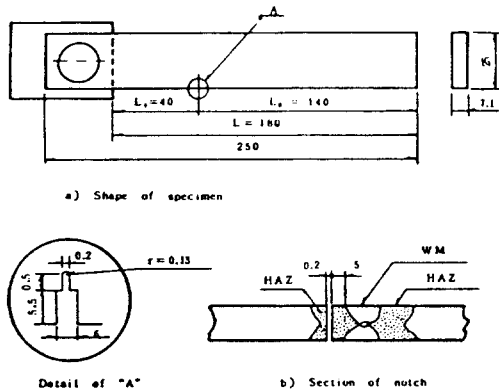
Specimen dimensions and notch position for corrosion fatigue test(mm).
